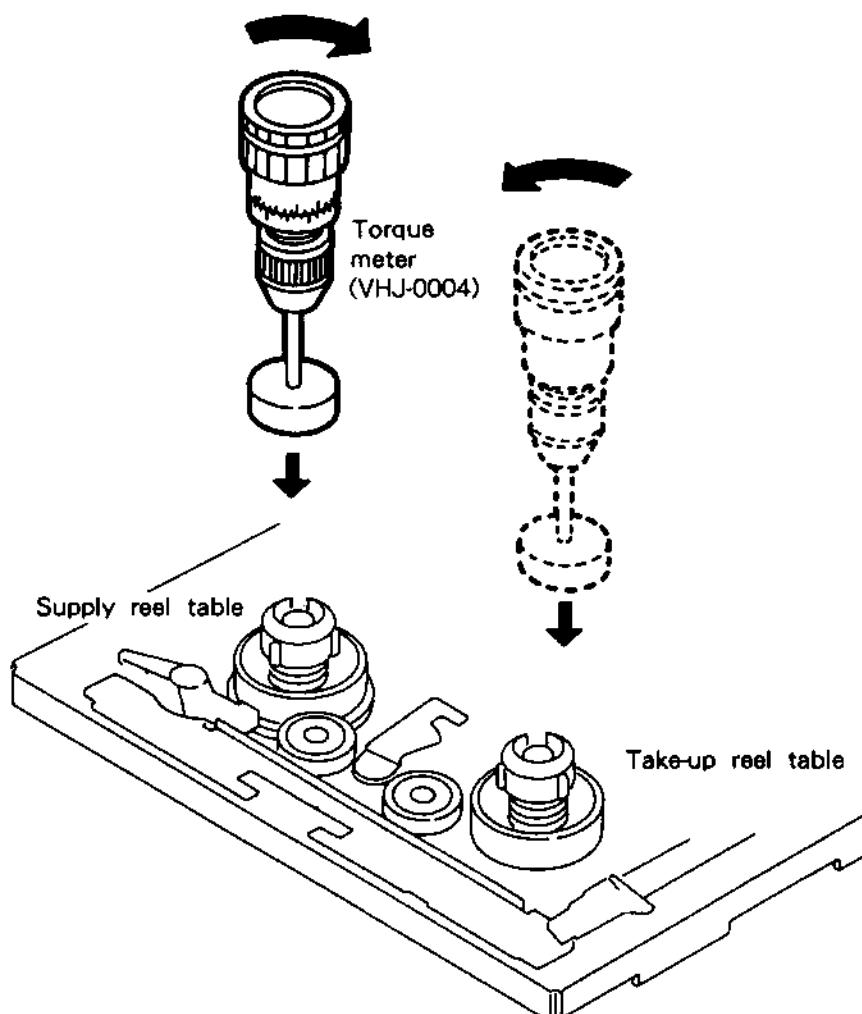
Checking REW/FF/PLAY Torque
